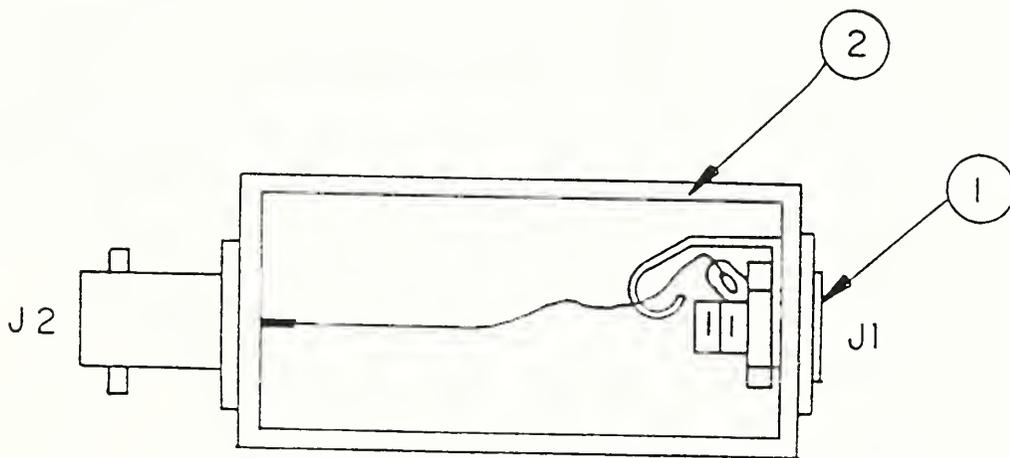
Microphone to BNC Adapter, Assembly Drawing
